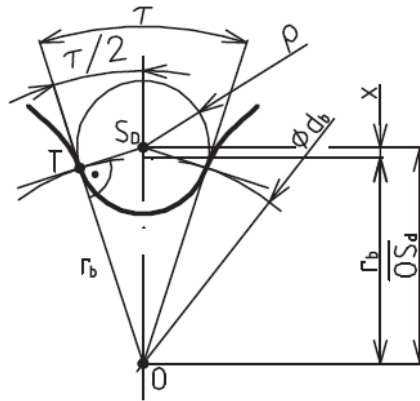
Detail of base fillet of the pin gearing wheel.
